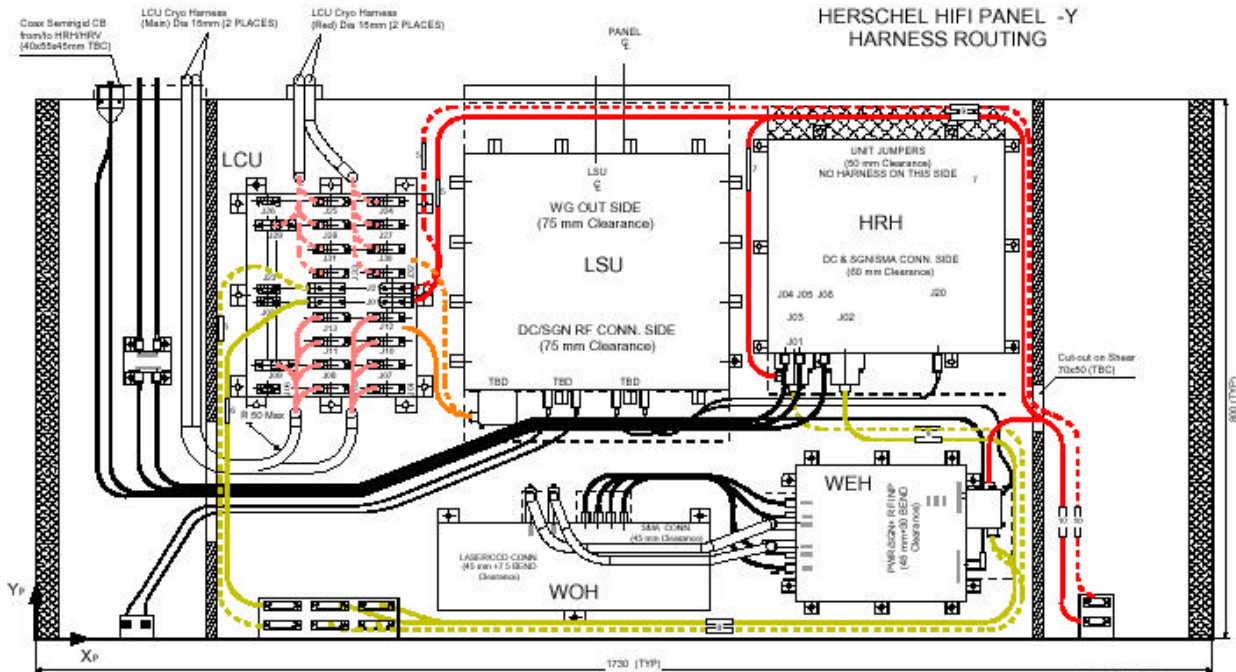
HIFI -Y PANEL LAYOUT
